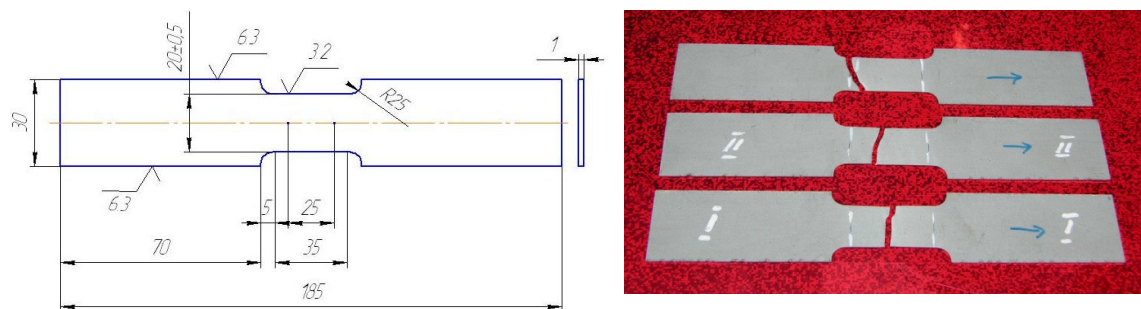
Dimensions and pictures of specimens for tensile test of the molybdenum sheet
